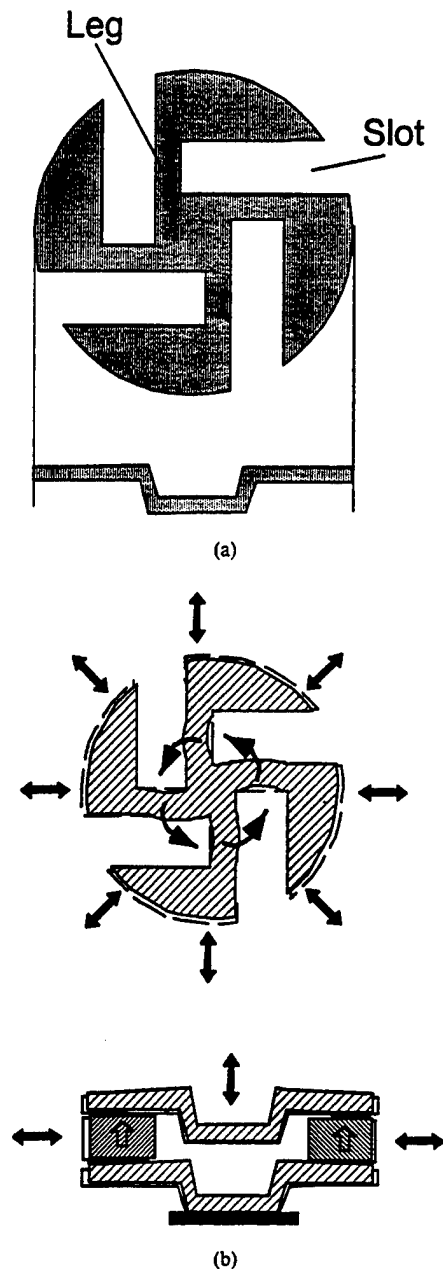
(a) Top and cross-sectional views of the metal endcap. (b) Top and cross-sectional view of the stator displacement. Windmill-like slits were cut by EDM.
